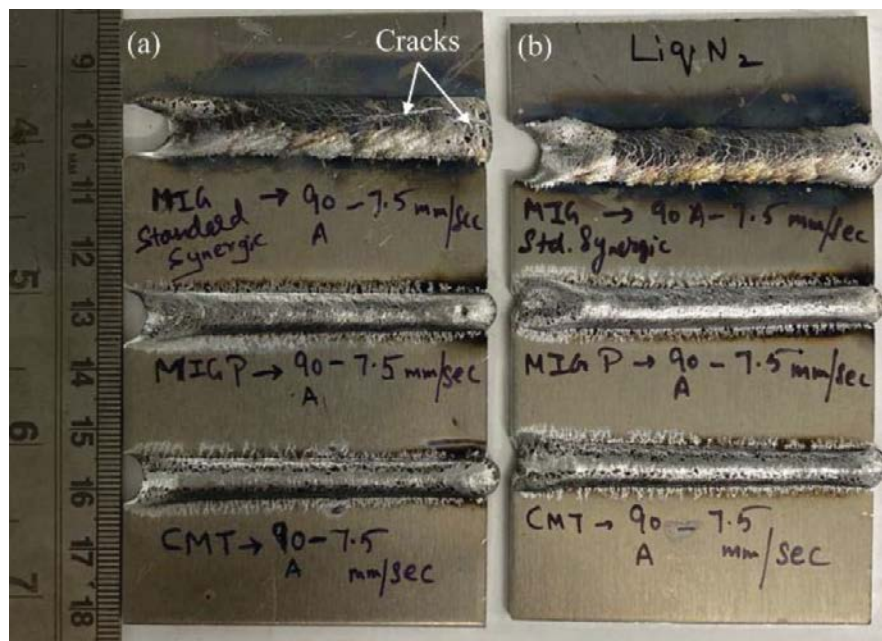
Weld bead profile of different welding techniques: (a) without LN₂ (b) With LN₂.
